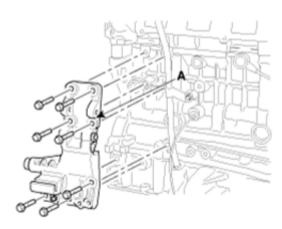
Identifying Tensioner Assembly Integrated Bracket Courtesy of KIA MOTORS AMERICA, INC.
